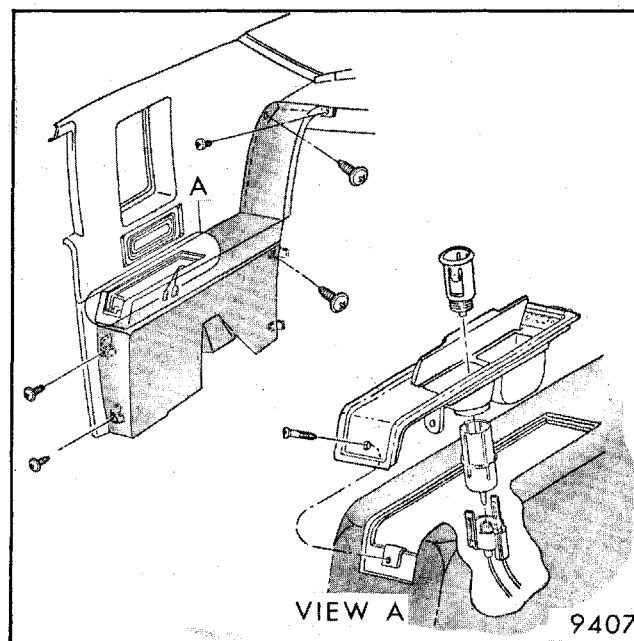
Quarter Lower Trim Assembly Attachment - Oldsmobile "E" Style Shown, Cadillac "E" Similar
